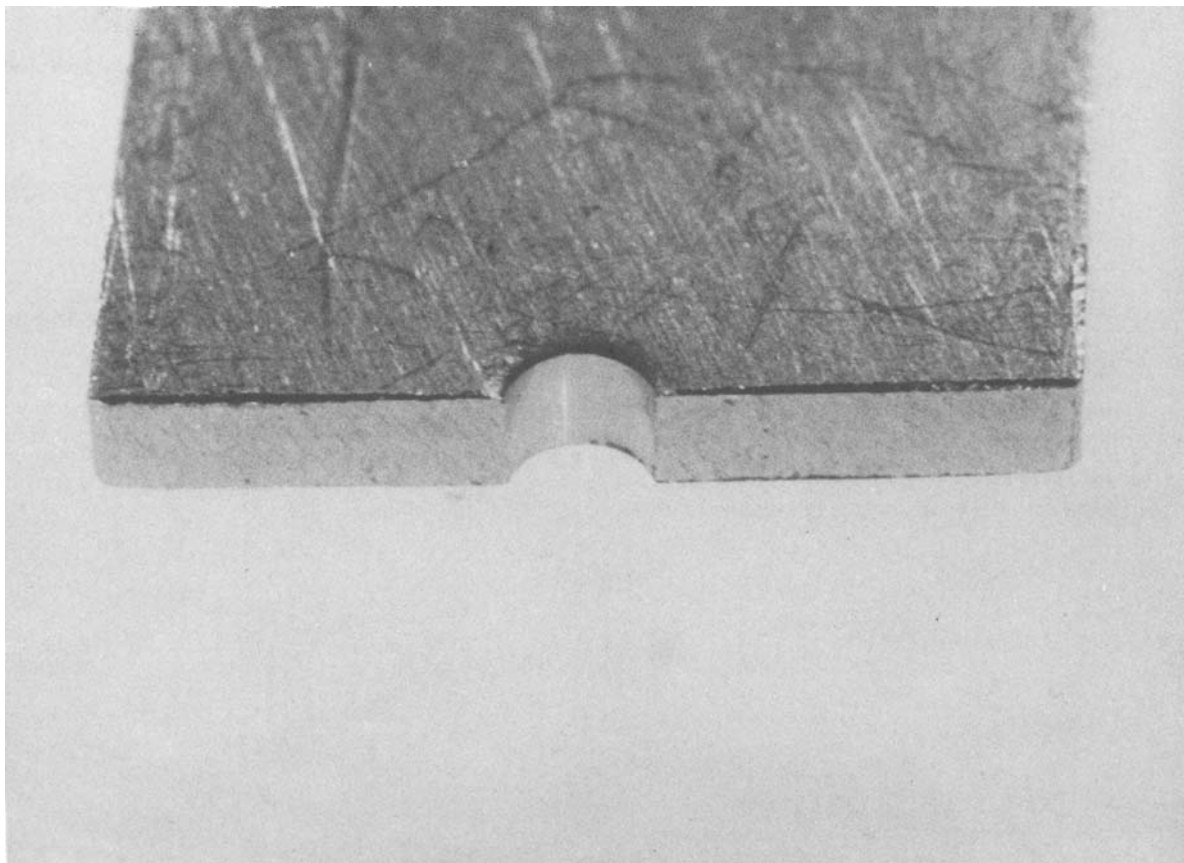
Photograph of a section of a workplate showing a hole pierced using a Stromberger type punch.
